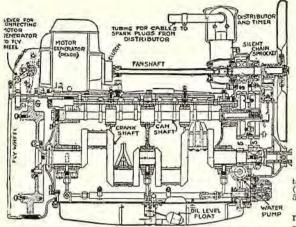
A—Location of the distributor and timer, and of the motor-generator on the Cadillac (Type 55).
